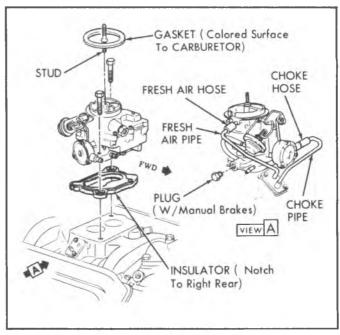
Carburetor and Choke Pipes, V8, 2Bbl.
